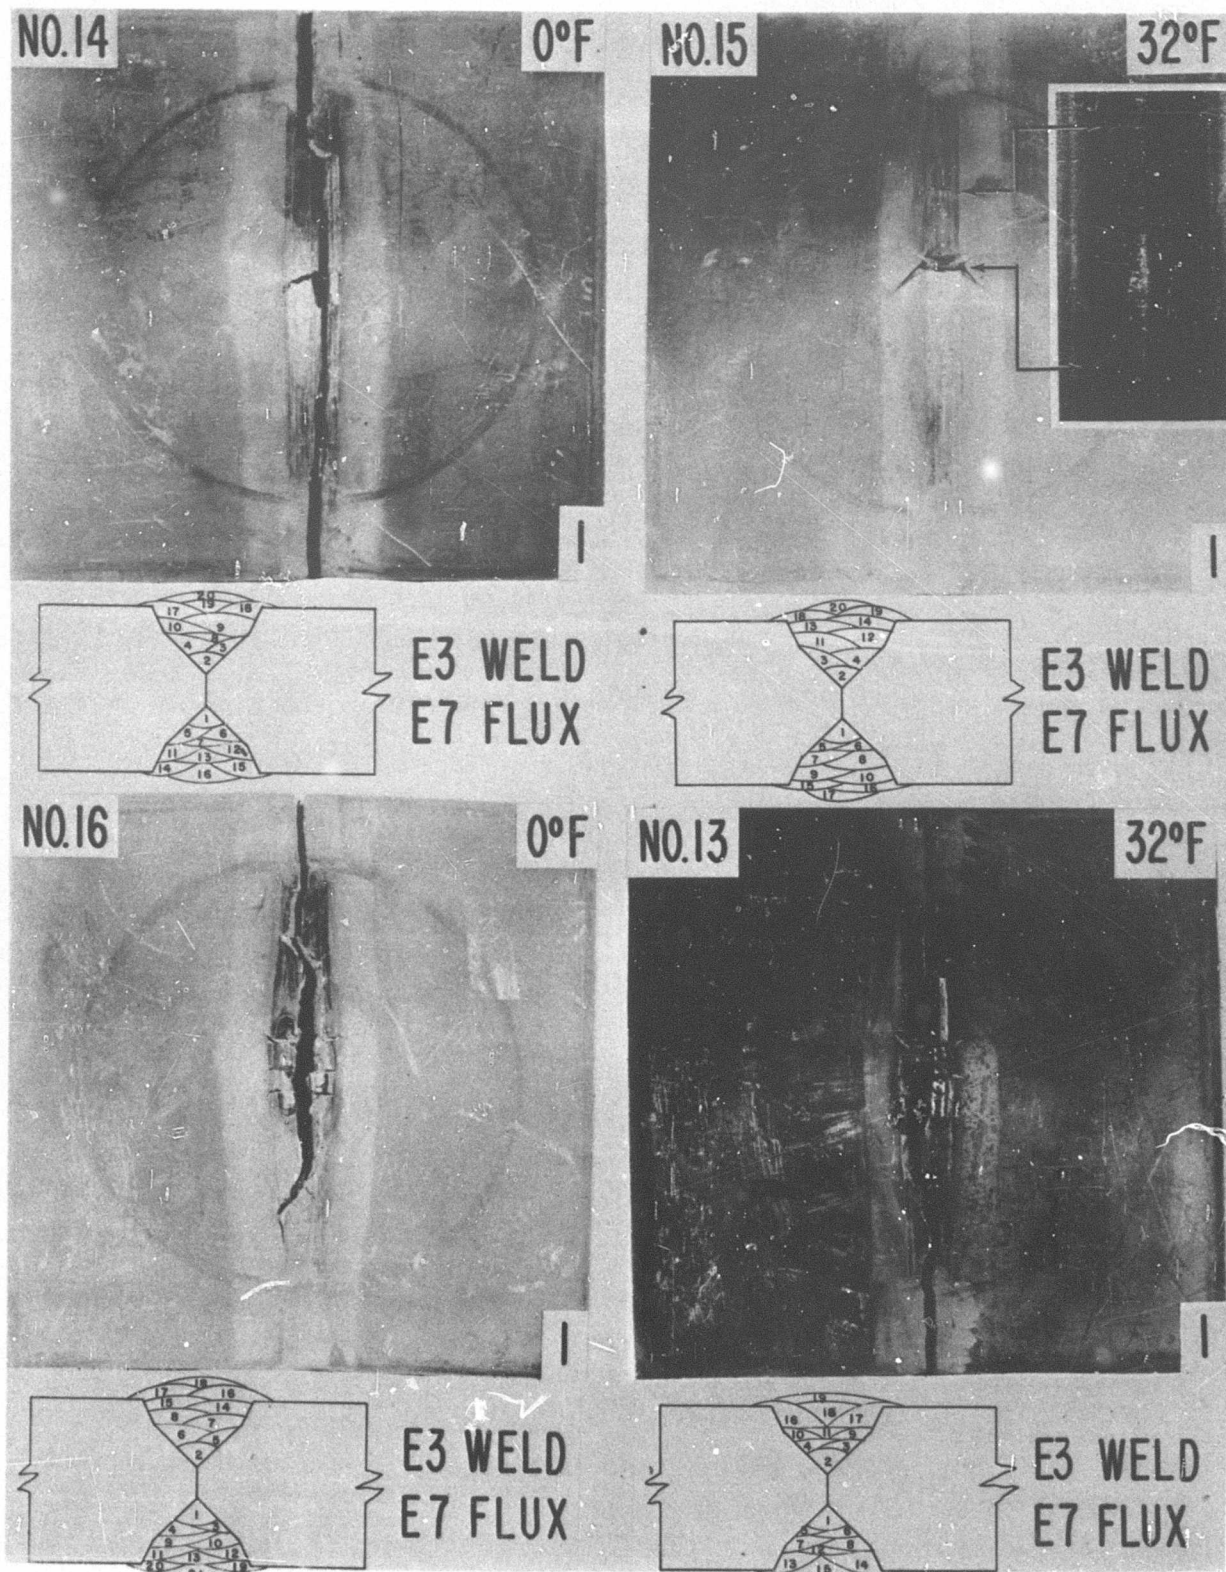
Explosion-bulge test fracture characteristics of submerged-arc weldments fabricated by MINSY. Bottom samples modified with crack-starter weld. Sample No. 15 contained transverse cracks in as-received condition (see photo inset at top right).
